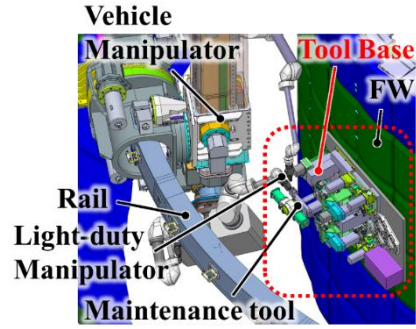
The BRHS consists of a Rail, Vehicle Manipulator, Light-duty Manipulator and Tool Base, and the maintenance tool is inserted into the Tool Base positioned on the FW
